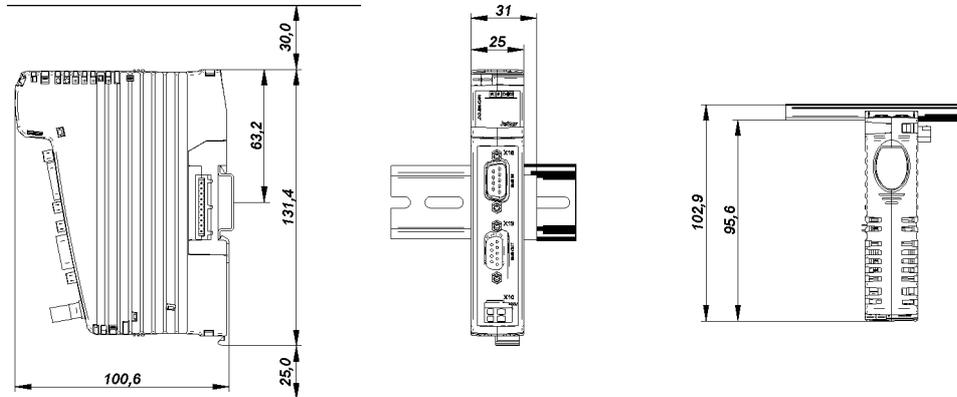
Physical dimensions, mounted on DIN-rail EN 50022 - 35 x 7.5
